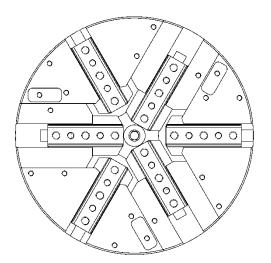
Assembly finger external assembly MFA, Range of inside seal diameter between $d_1$ =5 mm and $d_1$ =60 mm
